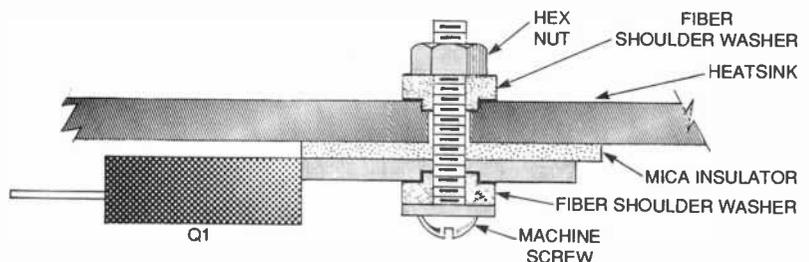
MOSFET Q1 must be mounted to the heatsink as shown here.
